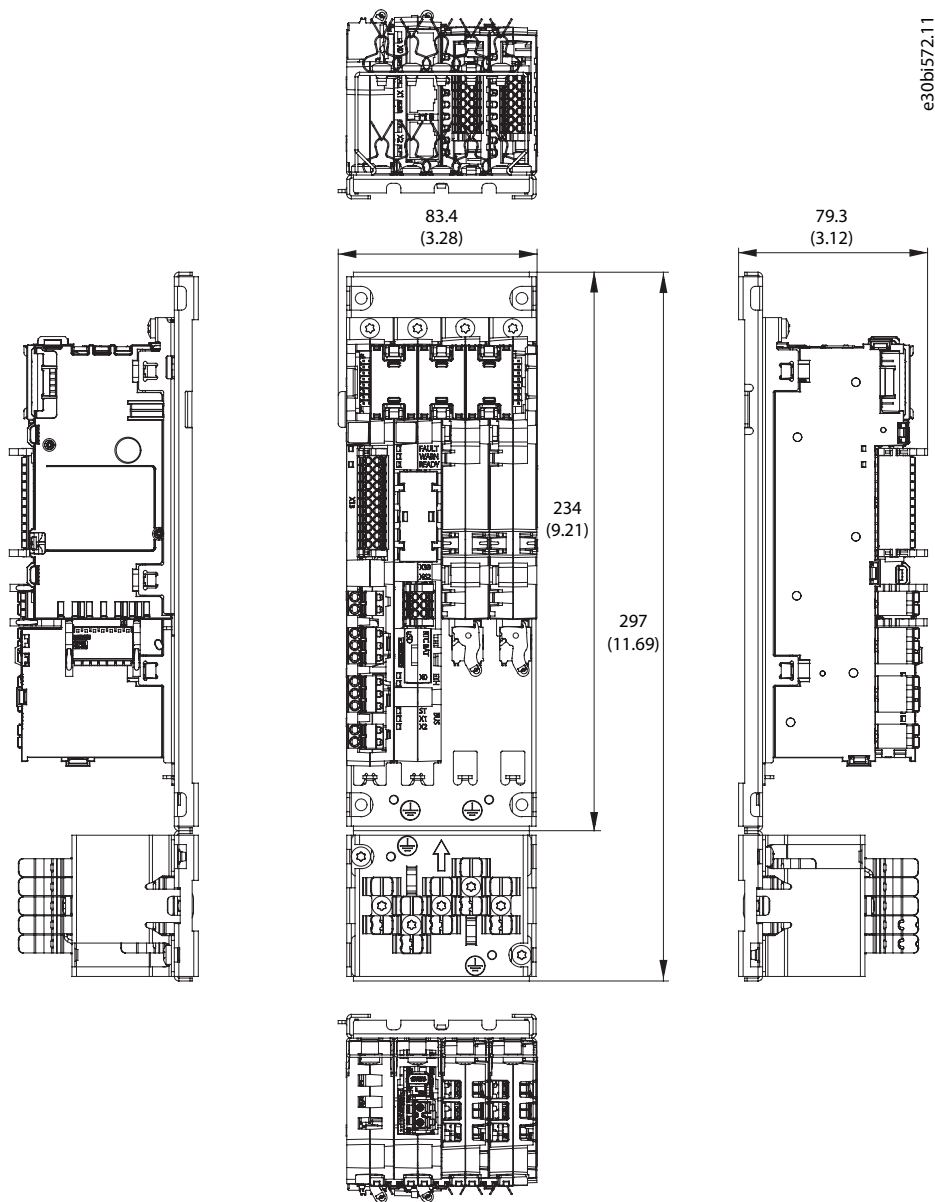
Dimensions of the Control Unit in mm (in), Example Configuration
